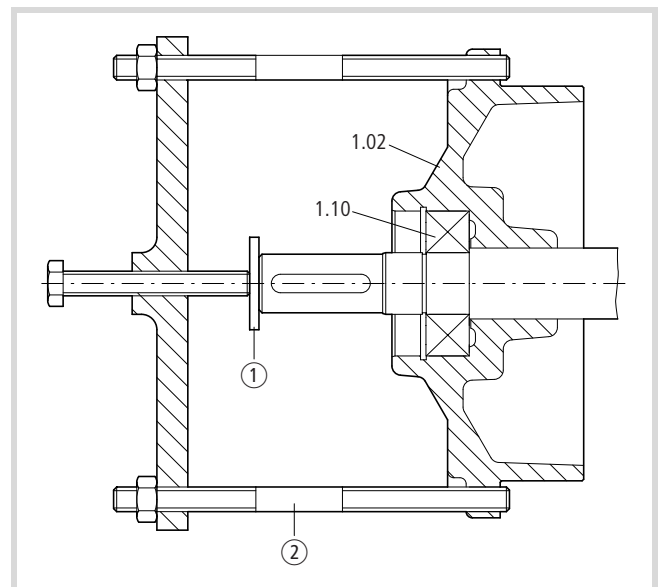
Removing the DE end shield (1.02) and DE roller bearing (1.10) from the shaft
